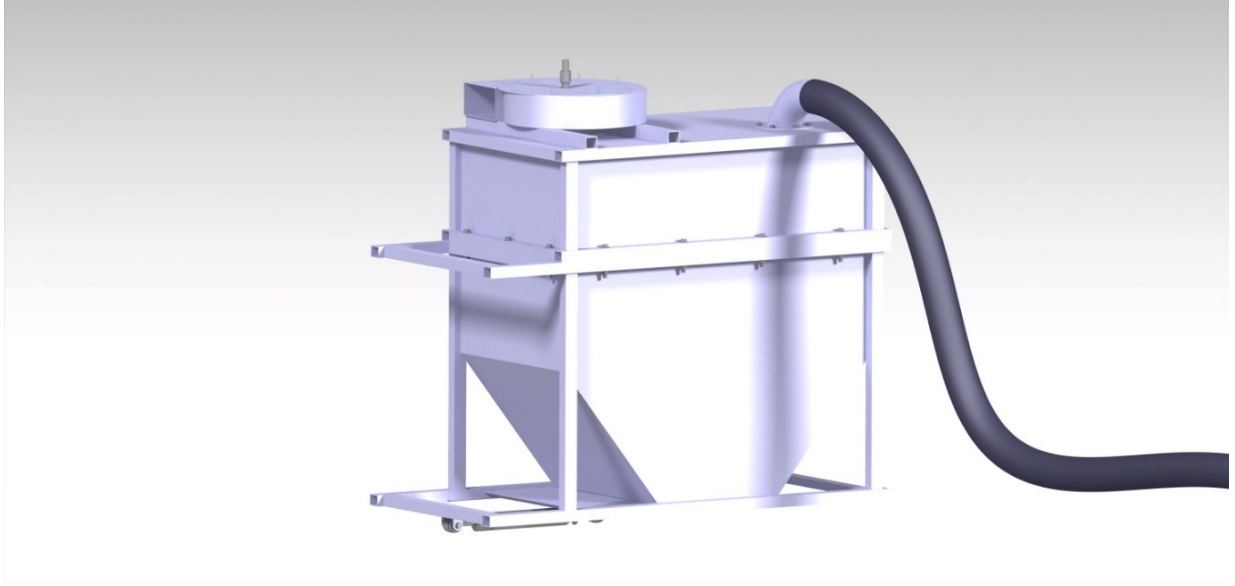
Aspirator device's assembly with rectangular bin designed in CAD software.
